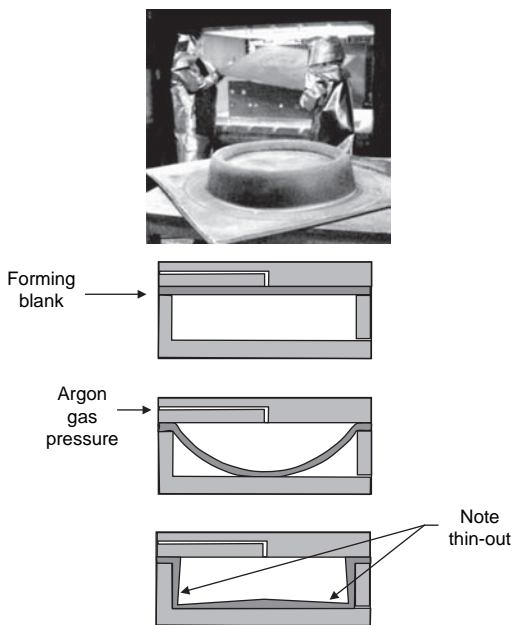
Single-sheet superplastic forming. Source: Ref 8
